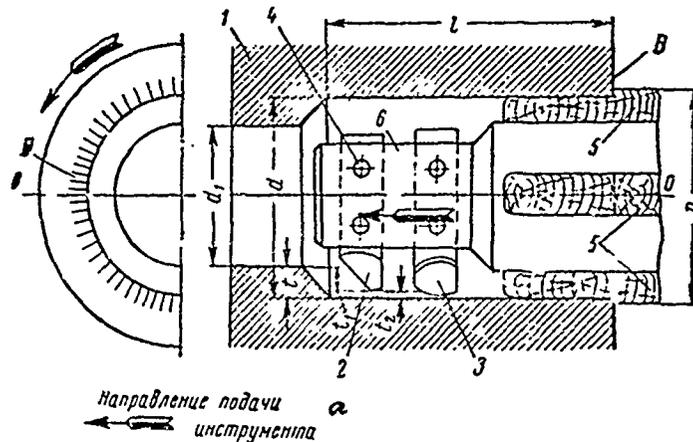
Schematic of operation setting for boring deep cylindrical holes
